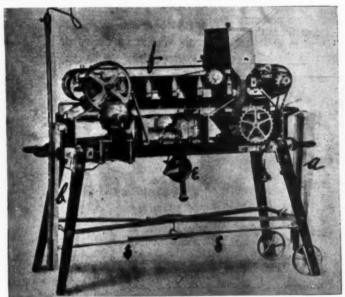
LABELING MACHINE WITH ELECTRIC MOTOR (Kindness F. H. Knapp Co., Chicago)
